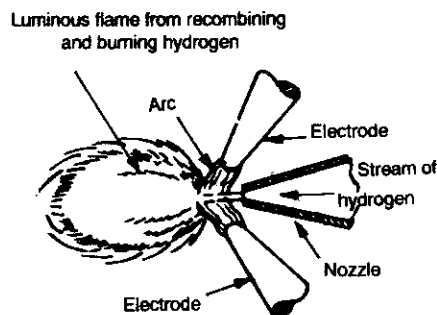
Atomic-hydrogen-arc welding
